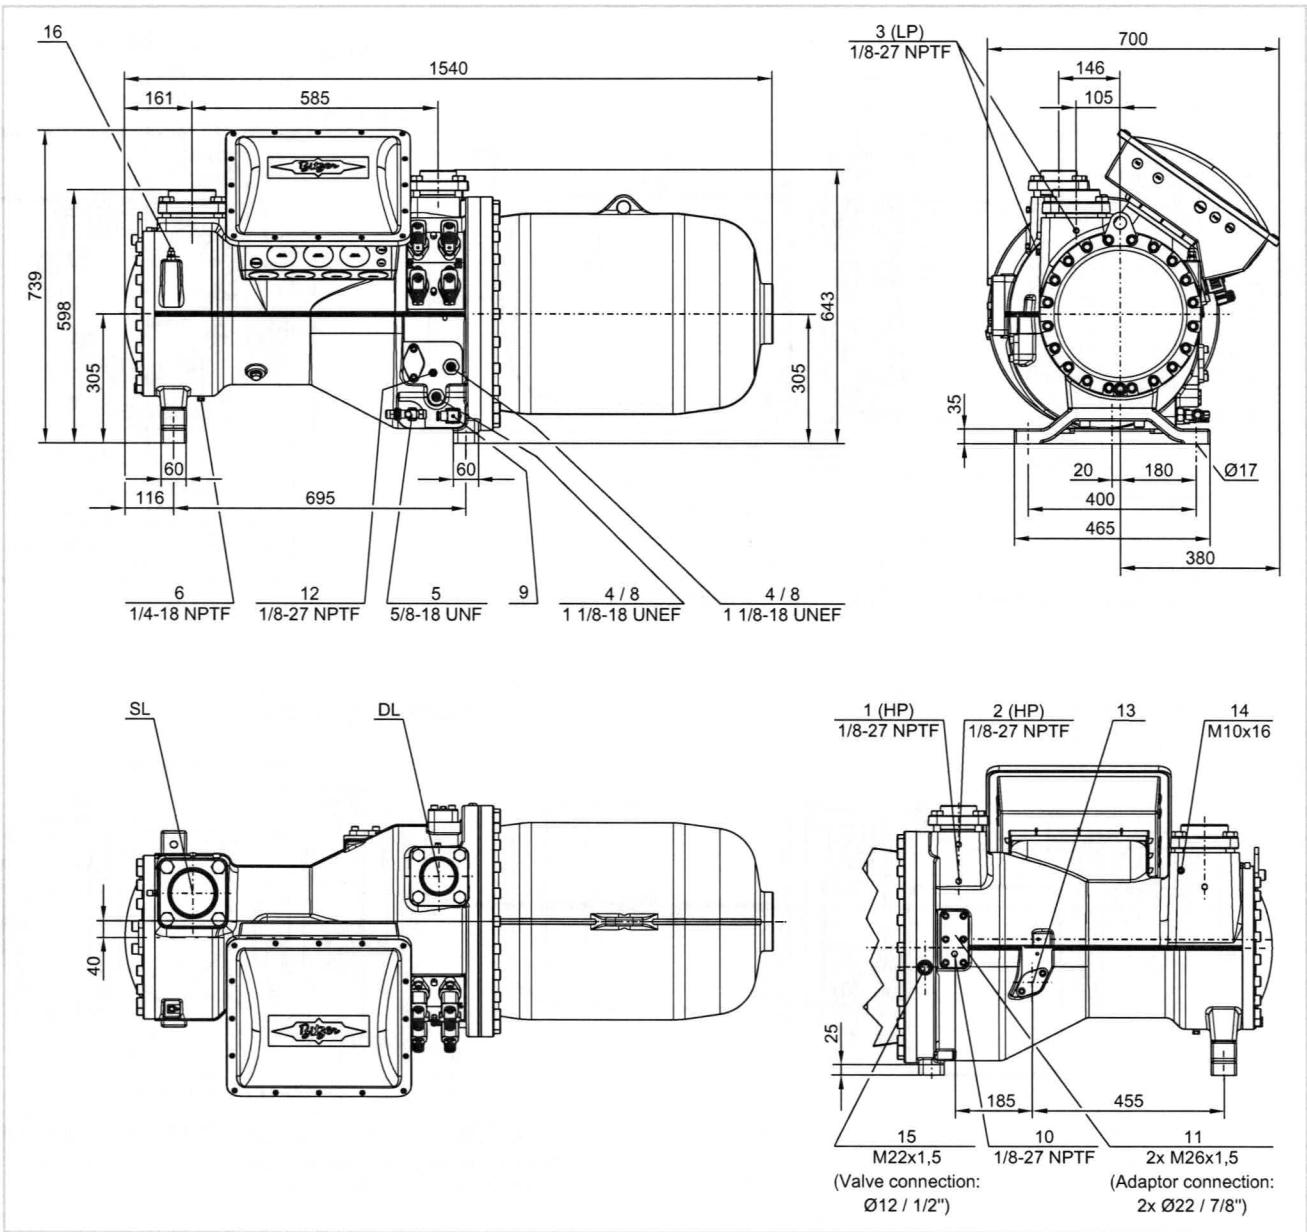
Dimensional drawing CSH8553-80Y .. CSH8593-180(Y)
